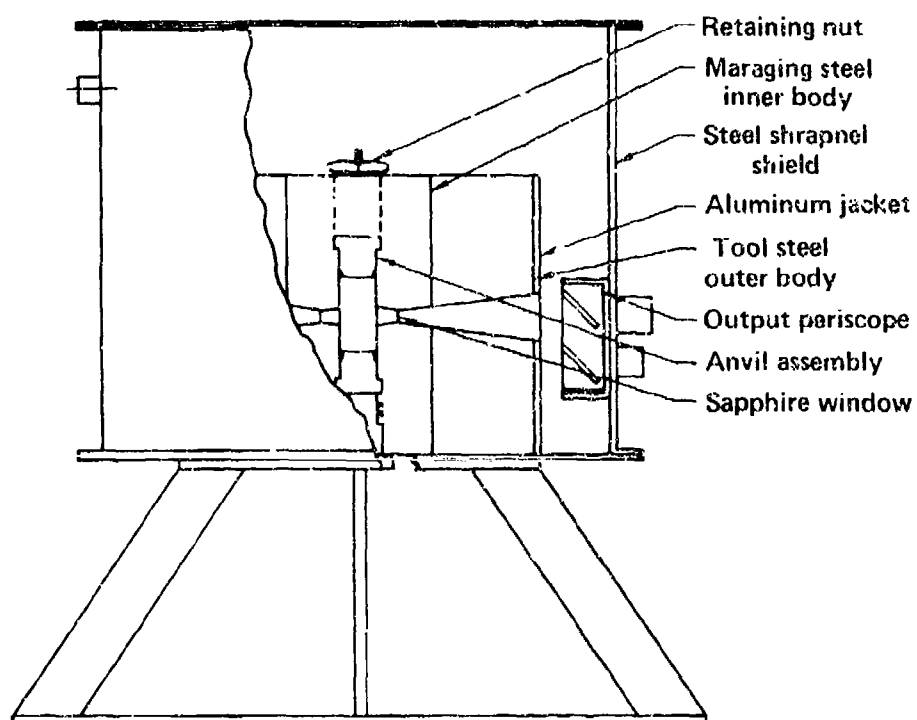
Drawing of the IEX Pressure Cell Assembly
